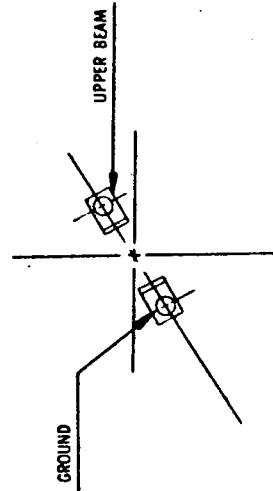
Dimensional Specifications for Integral Mount Sealed Beam Headlamps, Types G and H
